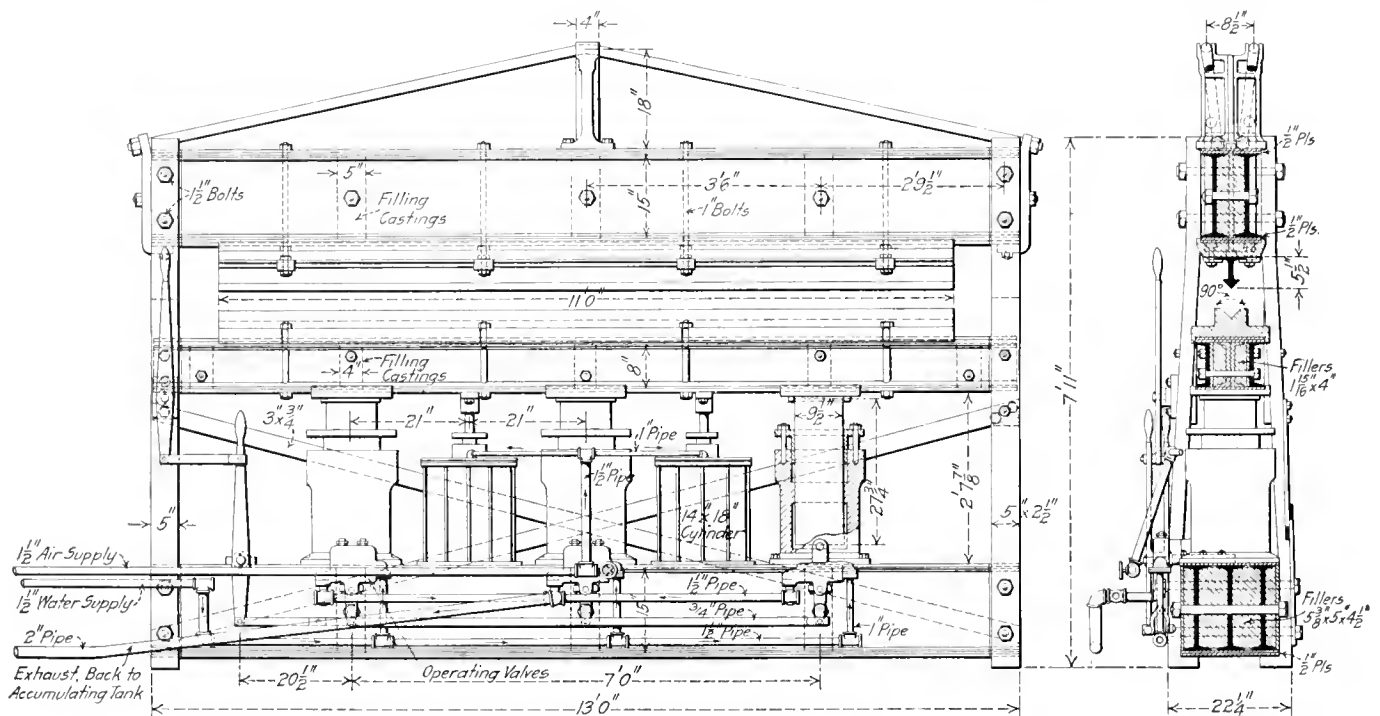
100-Ton Hydraulic Press for Steel Plates.
